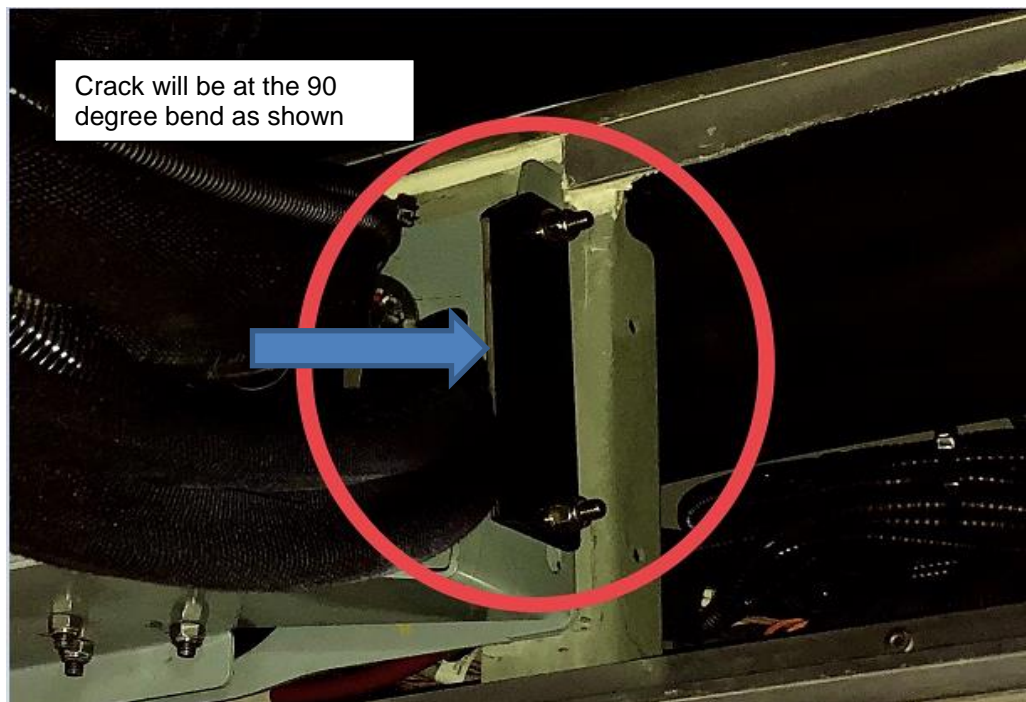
SHOWN VIEW OF EGS SUPPORT BRACKET
